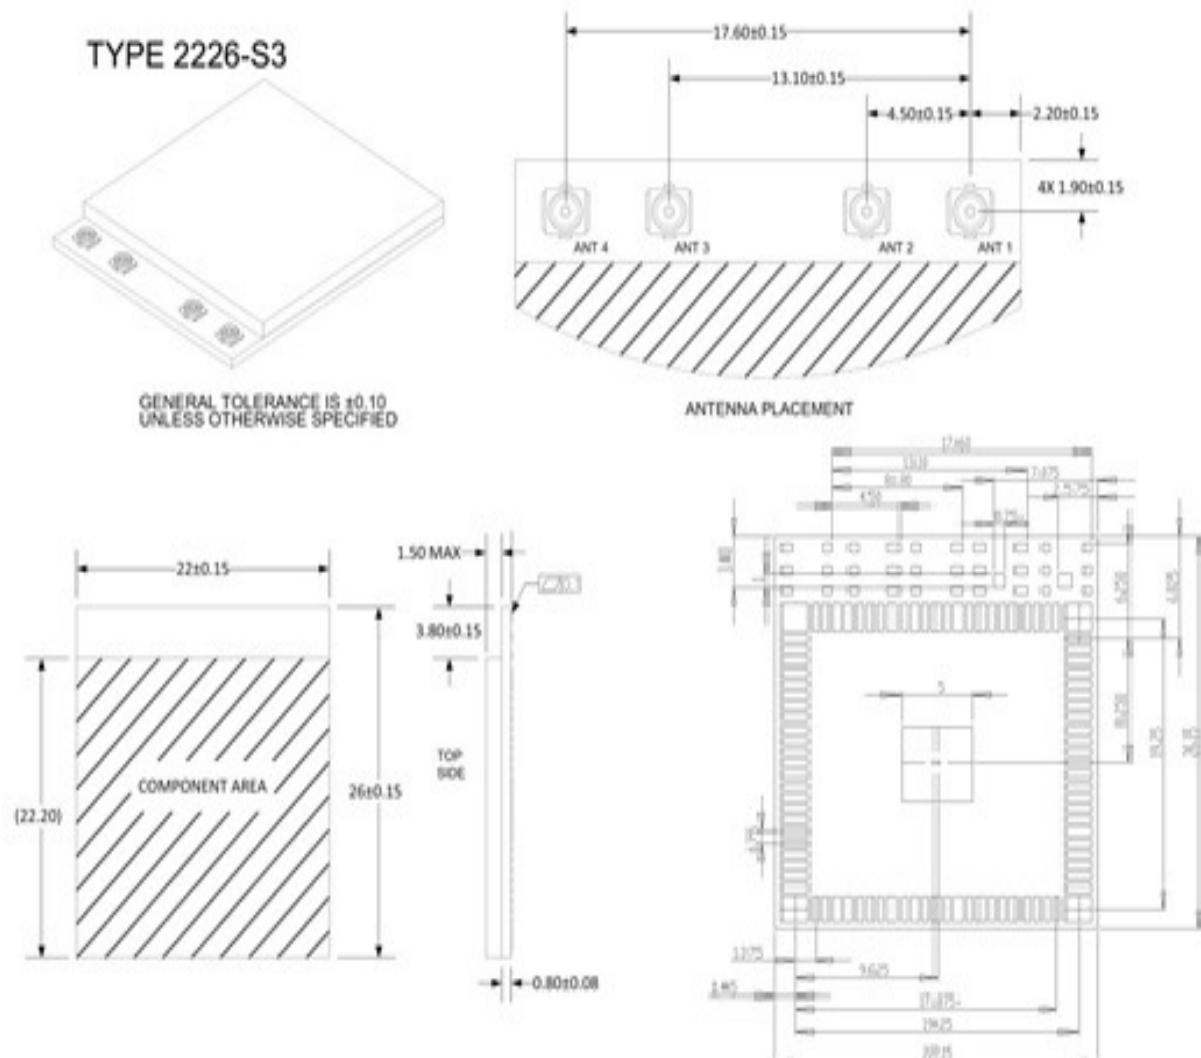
M.2 Type 2226-S3 Mechanical Outline Drawing
